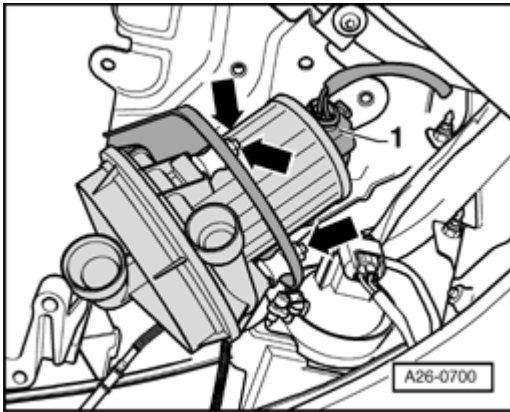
Disconnecting Electrical Connector & Removing Secondary Air Injection (AIR) Pump Motor V101
